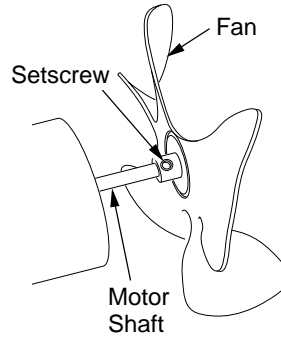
Fan, Motor Shaft, and Setscrew Location
